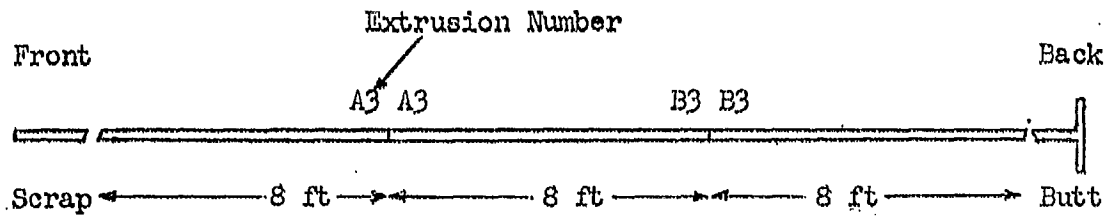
Diagram to show method of stamping sections of extruded rods to allow subsequent re-assembly as extruded.
